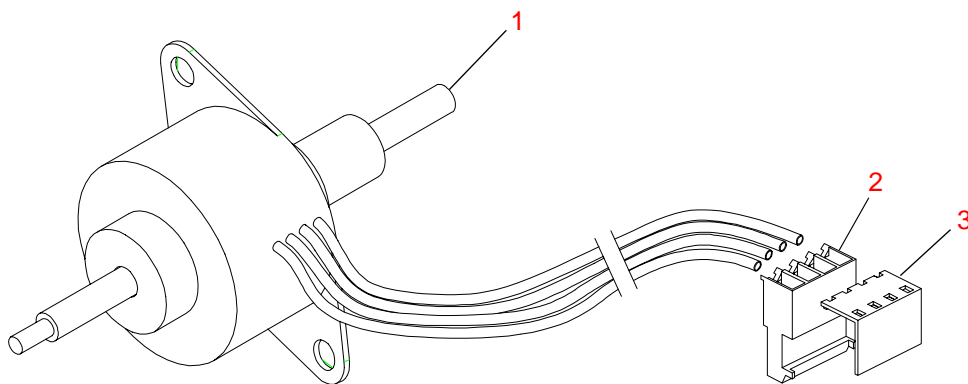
VL6B/VL6C Edge Motor Assembly
